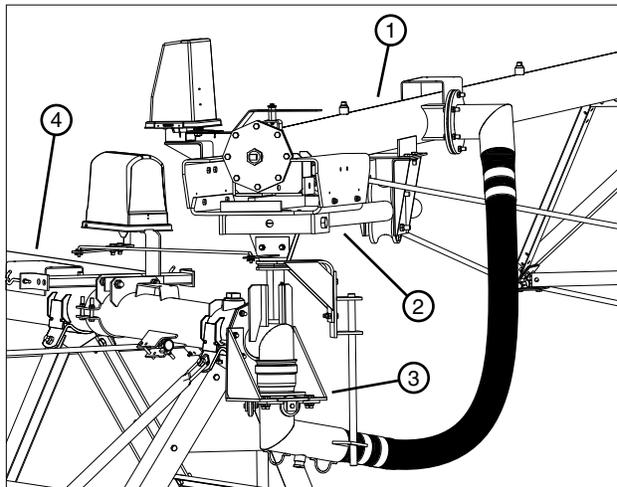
1. Connecting Span 3. Swivel Inlet
